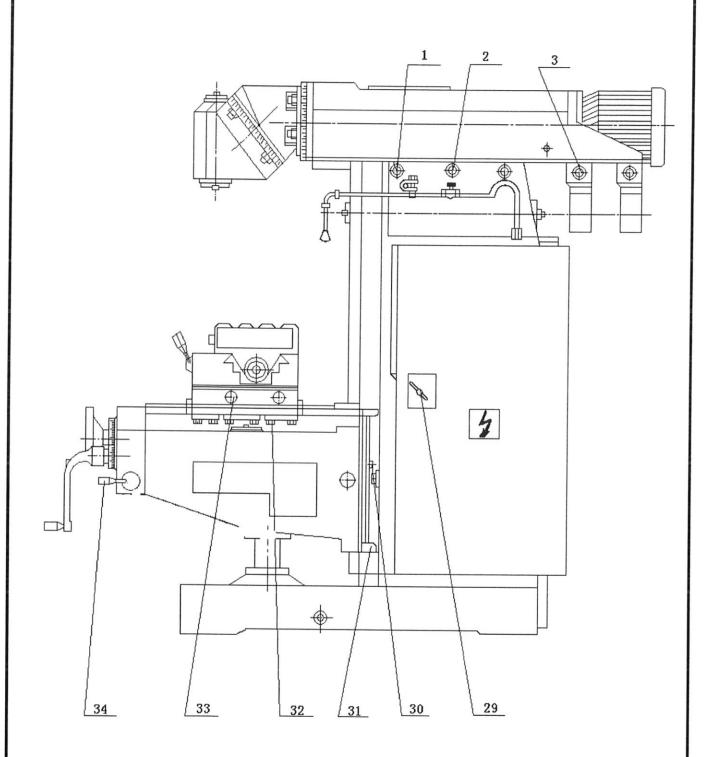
Right view of series X6230 Universal Rotary-Head Milling Machine
